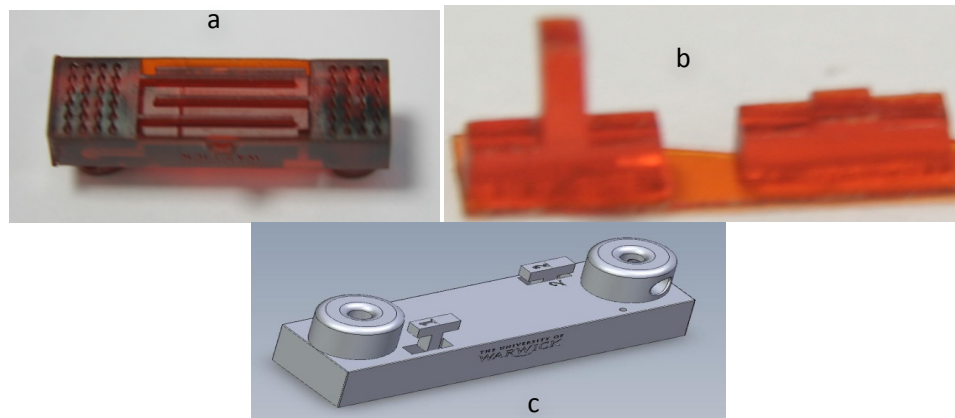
a) Miniaturised sensor chamber design b) alignment hole cover c) Exploded view of chamber assembly
